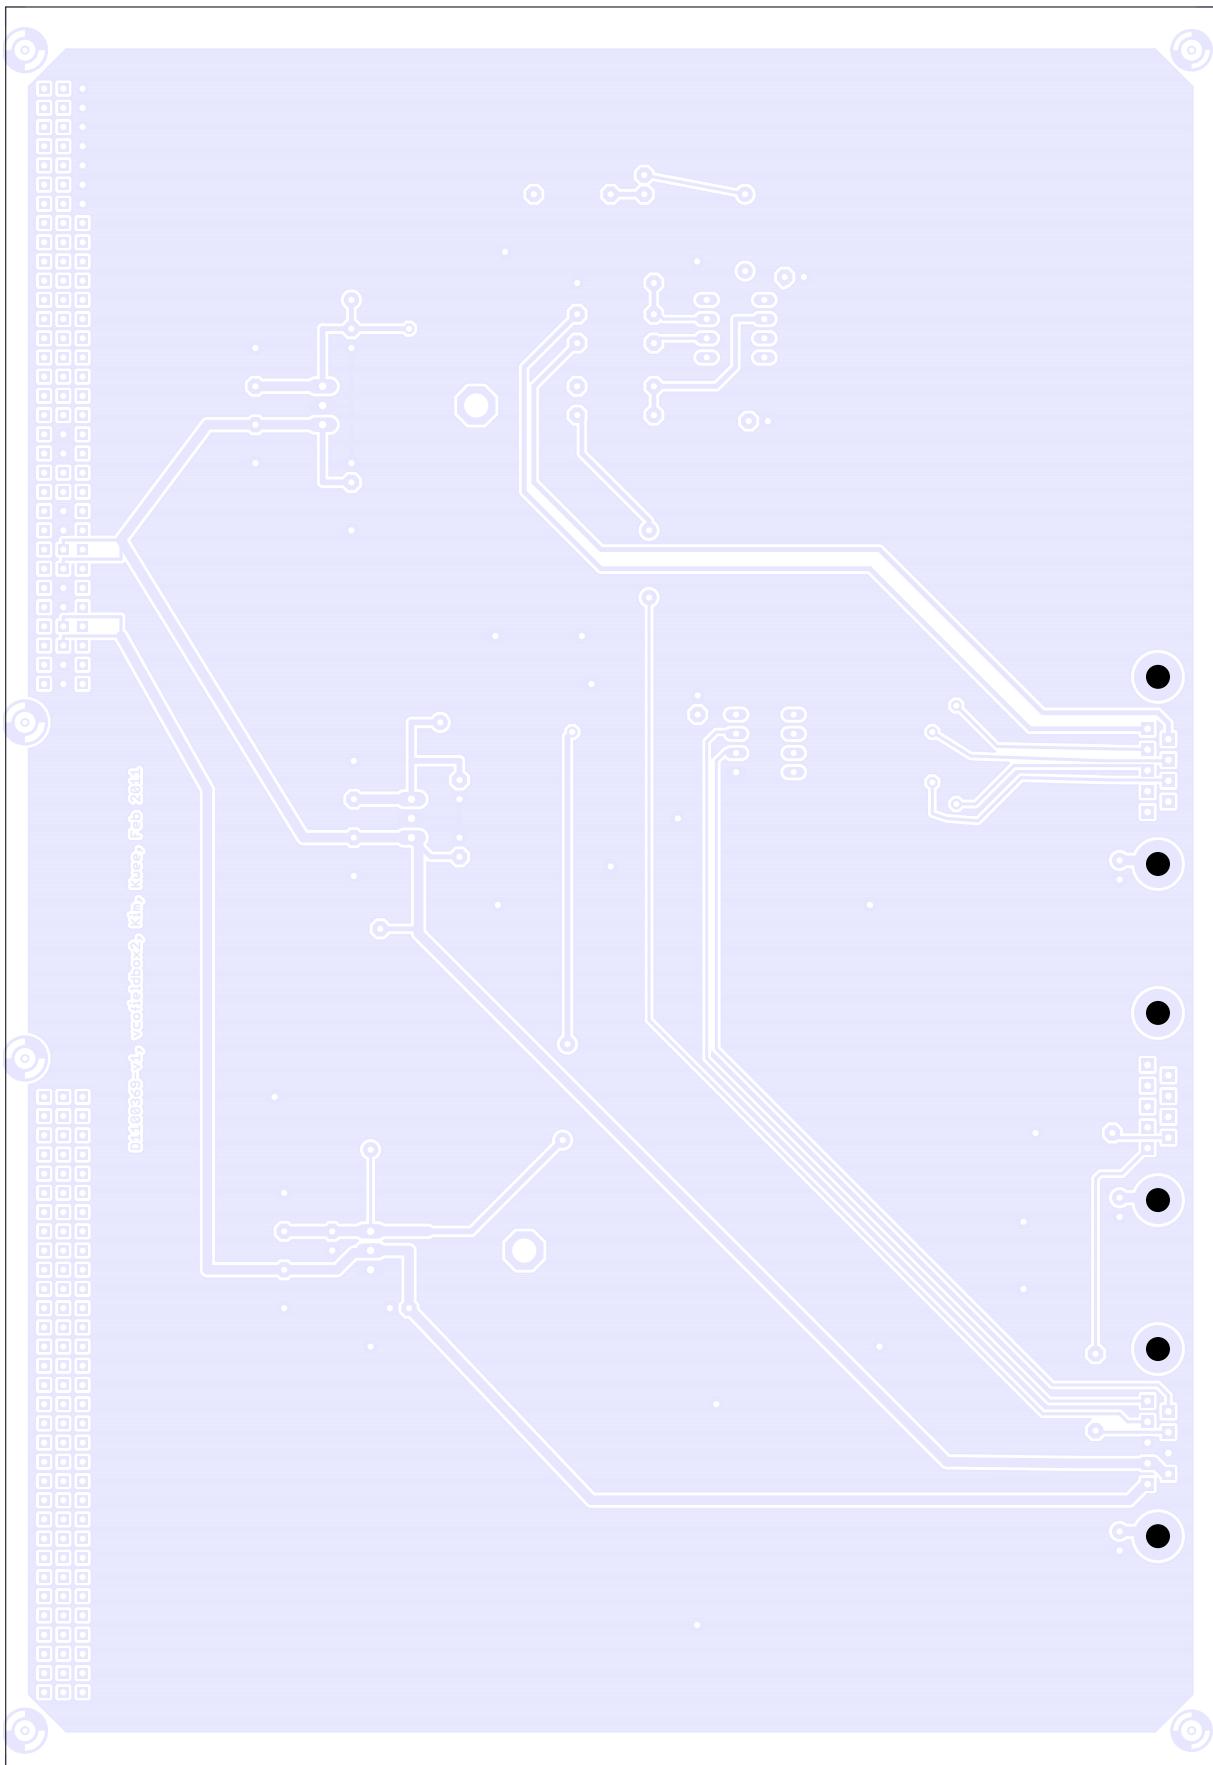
Board bottom view showing drills with 0.9 mm (0.035 in) diameter
